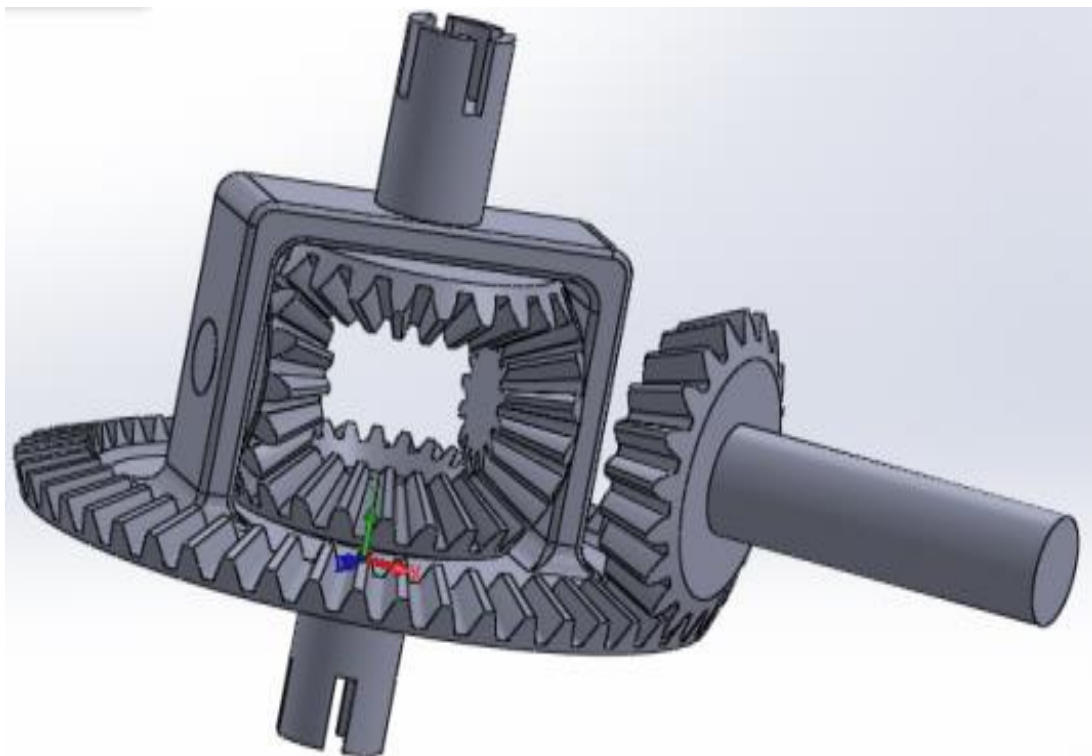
9 Bevel Gear design for the Generator (a) Overall gearing system
